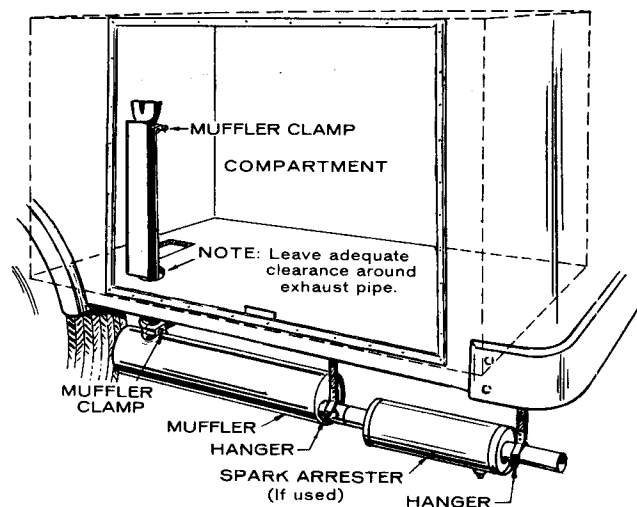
TYPICAL EXHAUST SYSTEM INSTALLATION
